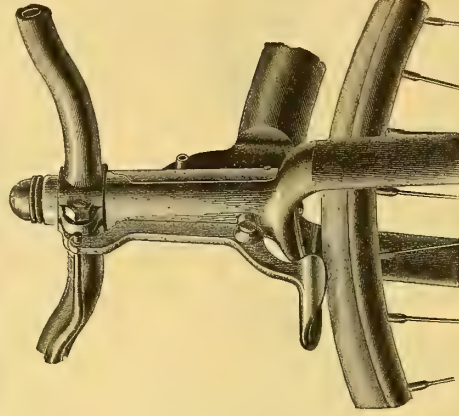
VICTOR HEAD, SHOWING MANNER OF ATTACHING HANDLE-BAR.
